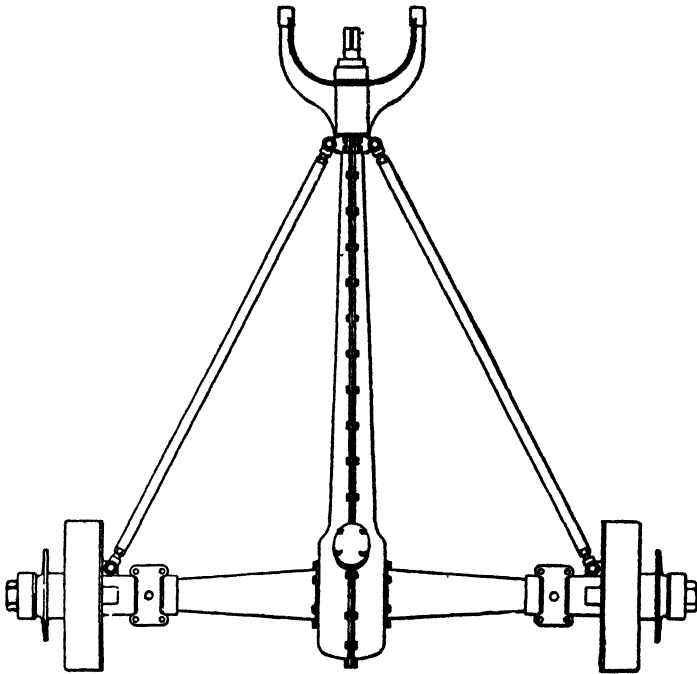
DIAGONAL BRACE RODS AND YOKED SUPPORT FOR TORQUE TUBE.
